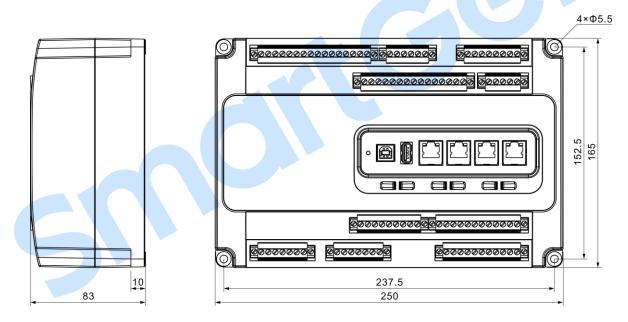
HPM6 Master Control Module Installation Dimensions (Unit: mm)
